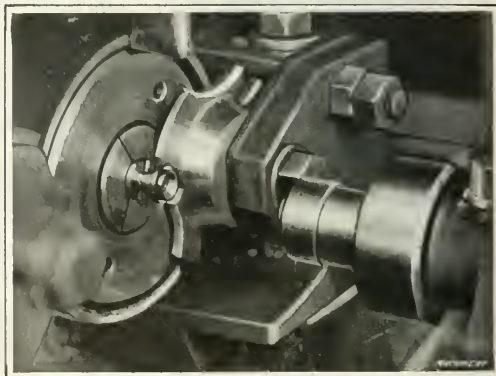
Punching Tripod Nut shown in Fig. 9, on Screw Machine
